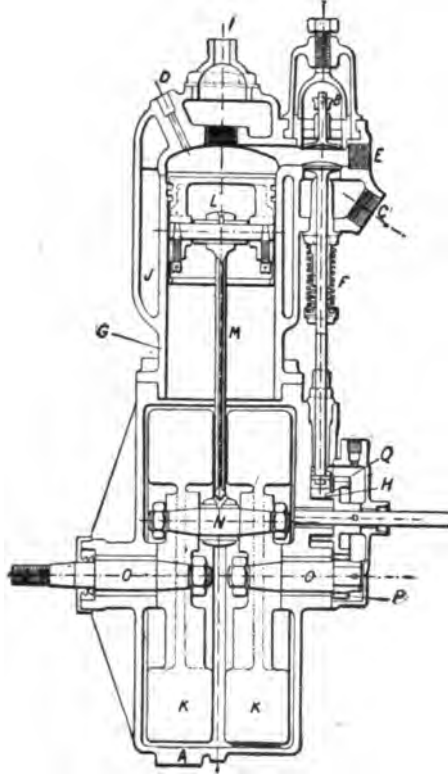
Section of the De Dion & Bouton Water-jacketed Carriage Motor. Parts are as follows: A, crank case formed by two cylindrical pieces bolted together; B, the inlet valve for the fuel mixture from the carburetter; C, the exhaust valve, held closed by a helical spring, F, and opened by the cam, H; D, the opening for the compression tap; E, the threaded hole for the sparking plug; F, the spring on the exhaust valve rod; G, the cylinder; I the port of exit for the jacket water from jacket, J, the inlet being at a point near the base of the jacket; K and K are the flywheels, or crank discs, which are joined together as shown, by the crank pin, N; M is the connecting rod; N is the crank pin; O and O are the crank shafts, that on the right carrying the pinion, P, that on the left being threaded for connection to the driving gear; P is a pinion on the crank shaft meshing with gear, Q.
